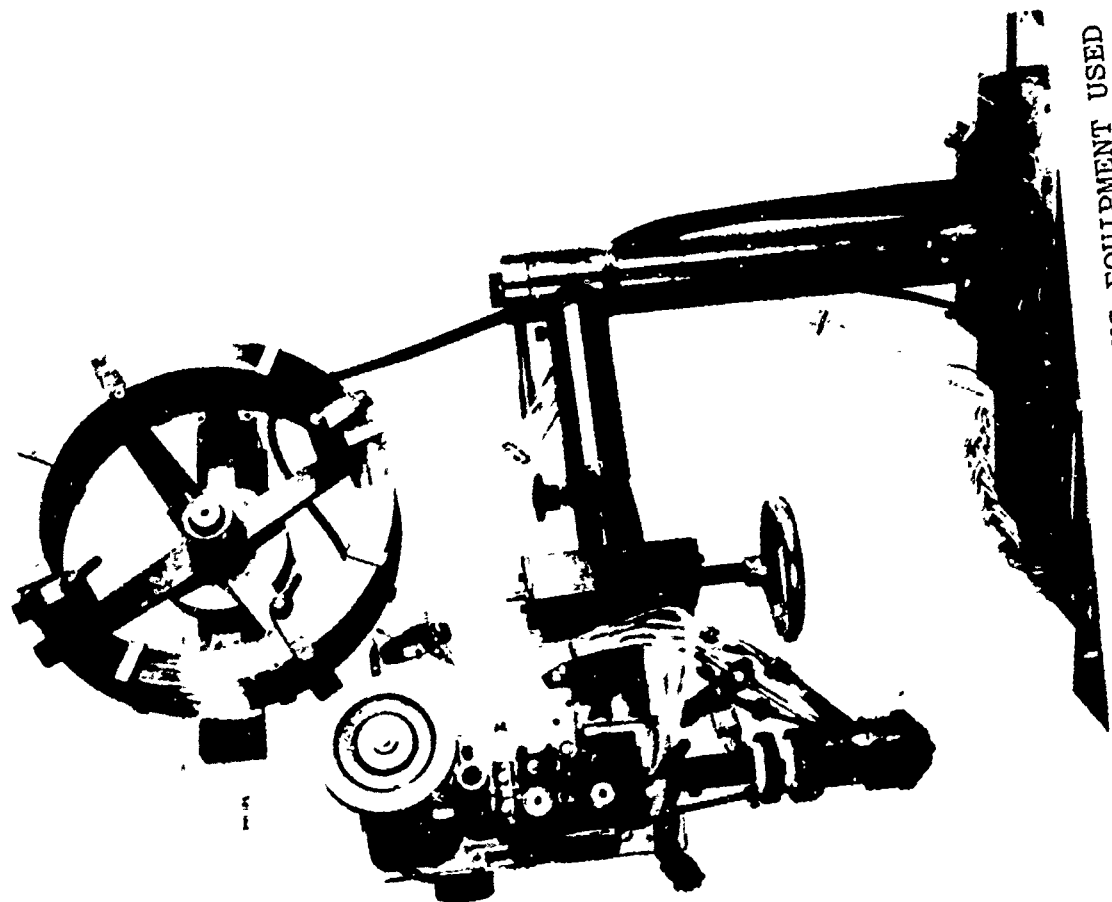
PLASMA-GMA WELDING EQUIPMENT USED FOR BUTT WELDING
